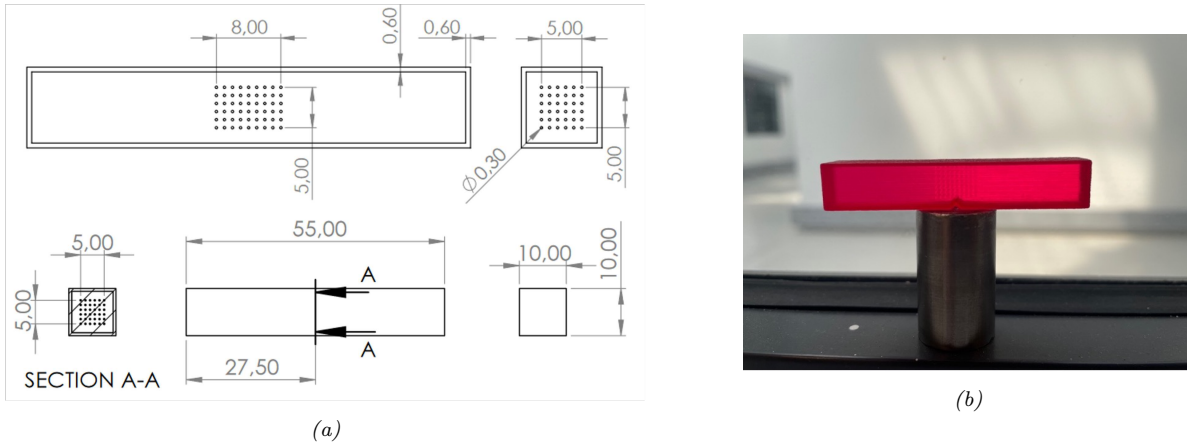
(a) Two-dimensional drawing of the 3D-printed specimen's CAD file used for observation with an optical microscope (b) The final 3D-printed specimen.
